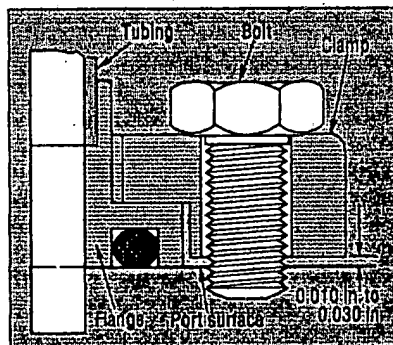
Properly designed and installed split-flange fitting has a uniform clearance of 0.010 to 0.030 in. between the port surface and clamp halves.
